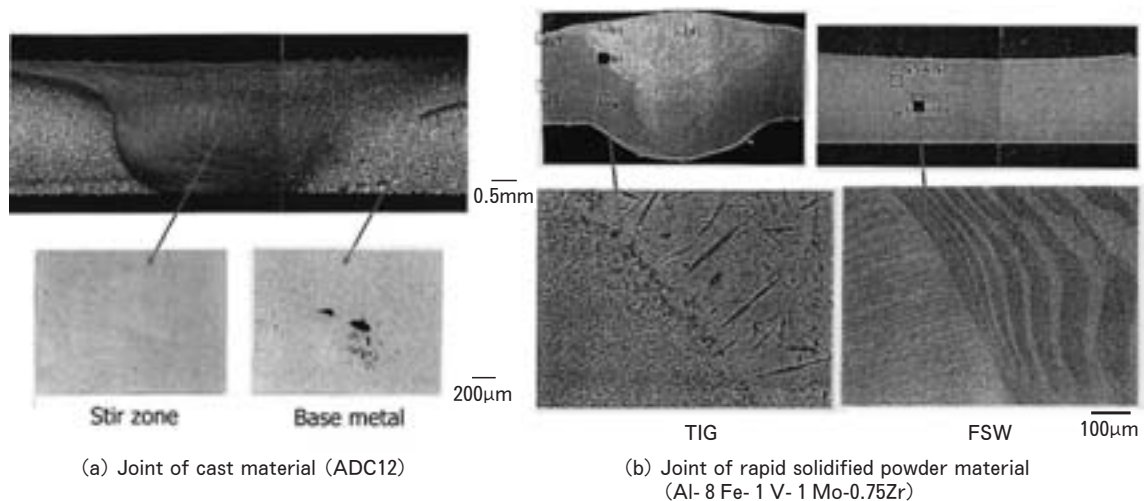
Advantage of friction stir welding comparing with fusion welding.
